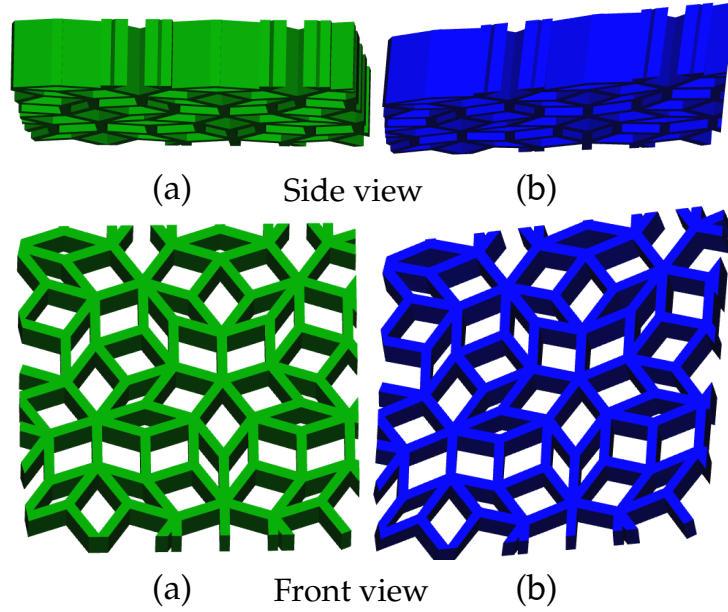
(a) The Initial CAD model (b) the deformed geometry that we try to recover.
